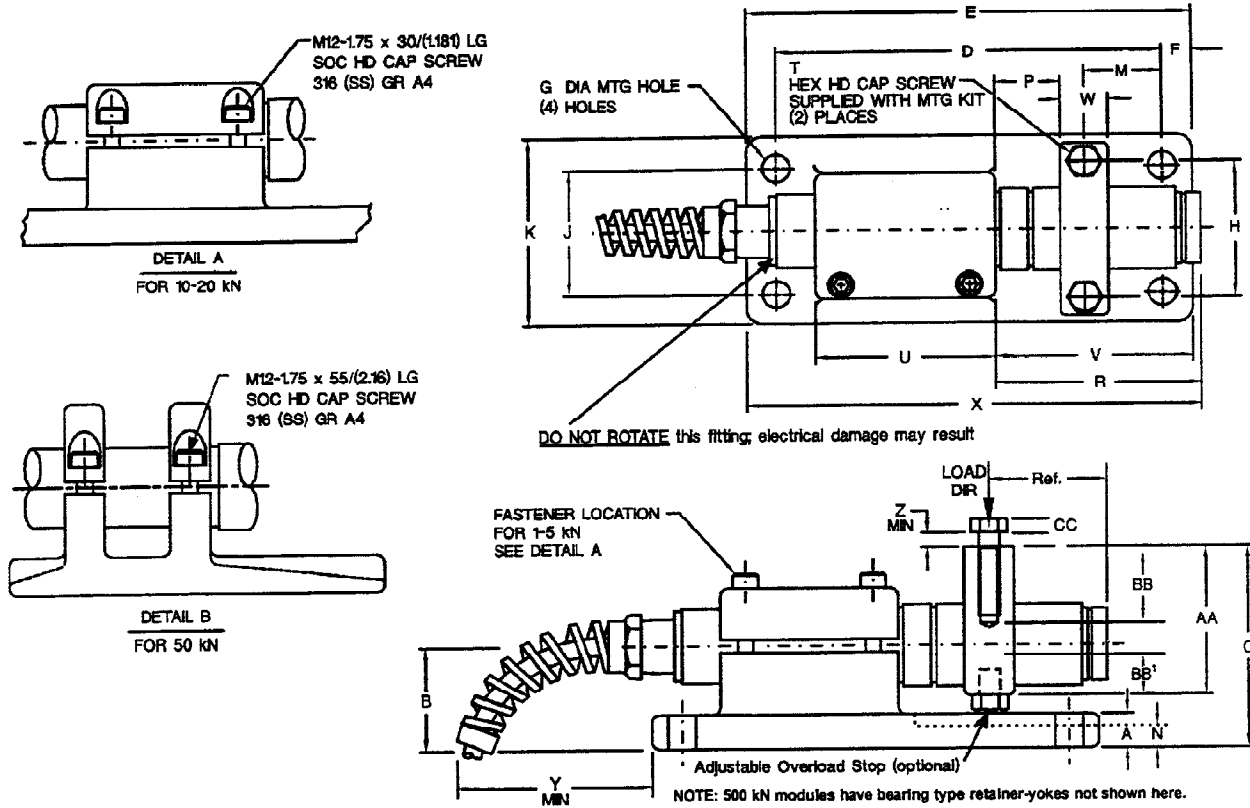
shows the outline dimensions for the KIS beam and Figure 1-5 gives dimensions for complete KIS Weigh Modules.
